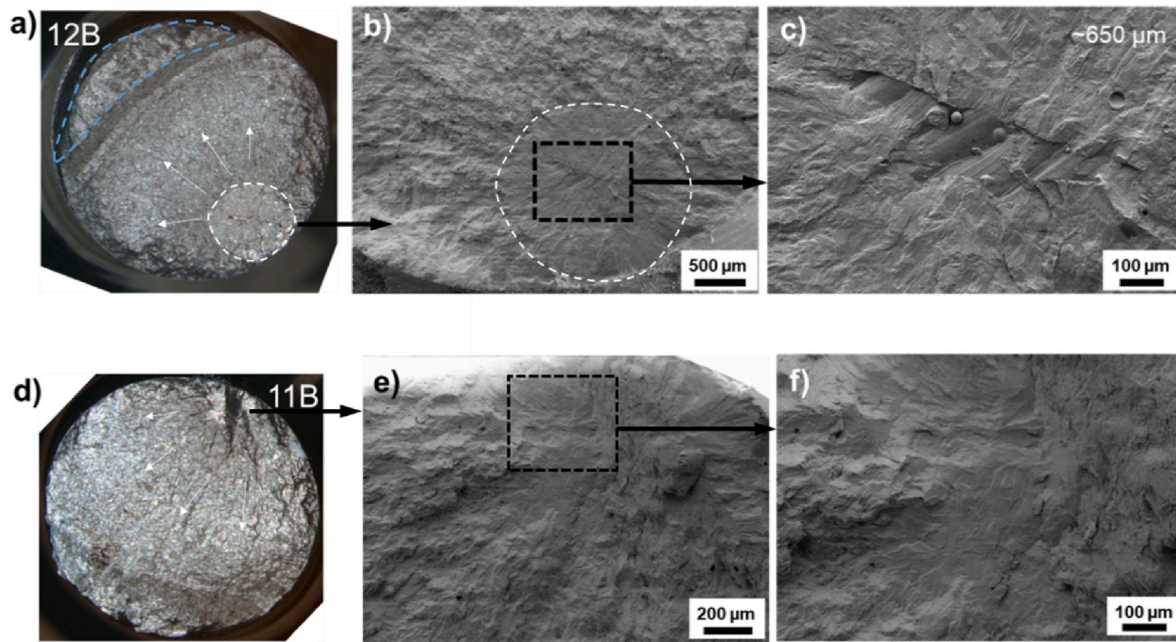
Fracture surfaces of specimens 12B (a–c) and 11B (d–f), set A. The images were acquired with SOM (a, d) and SEM (b–c, e–f).
